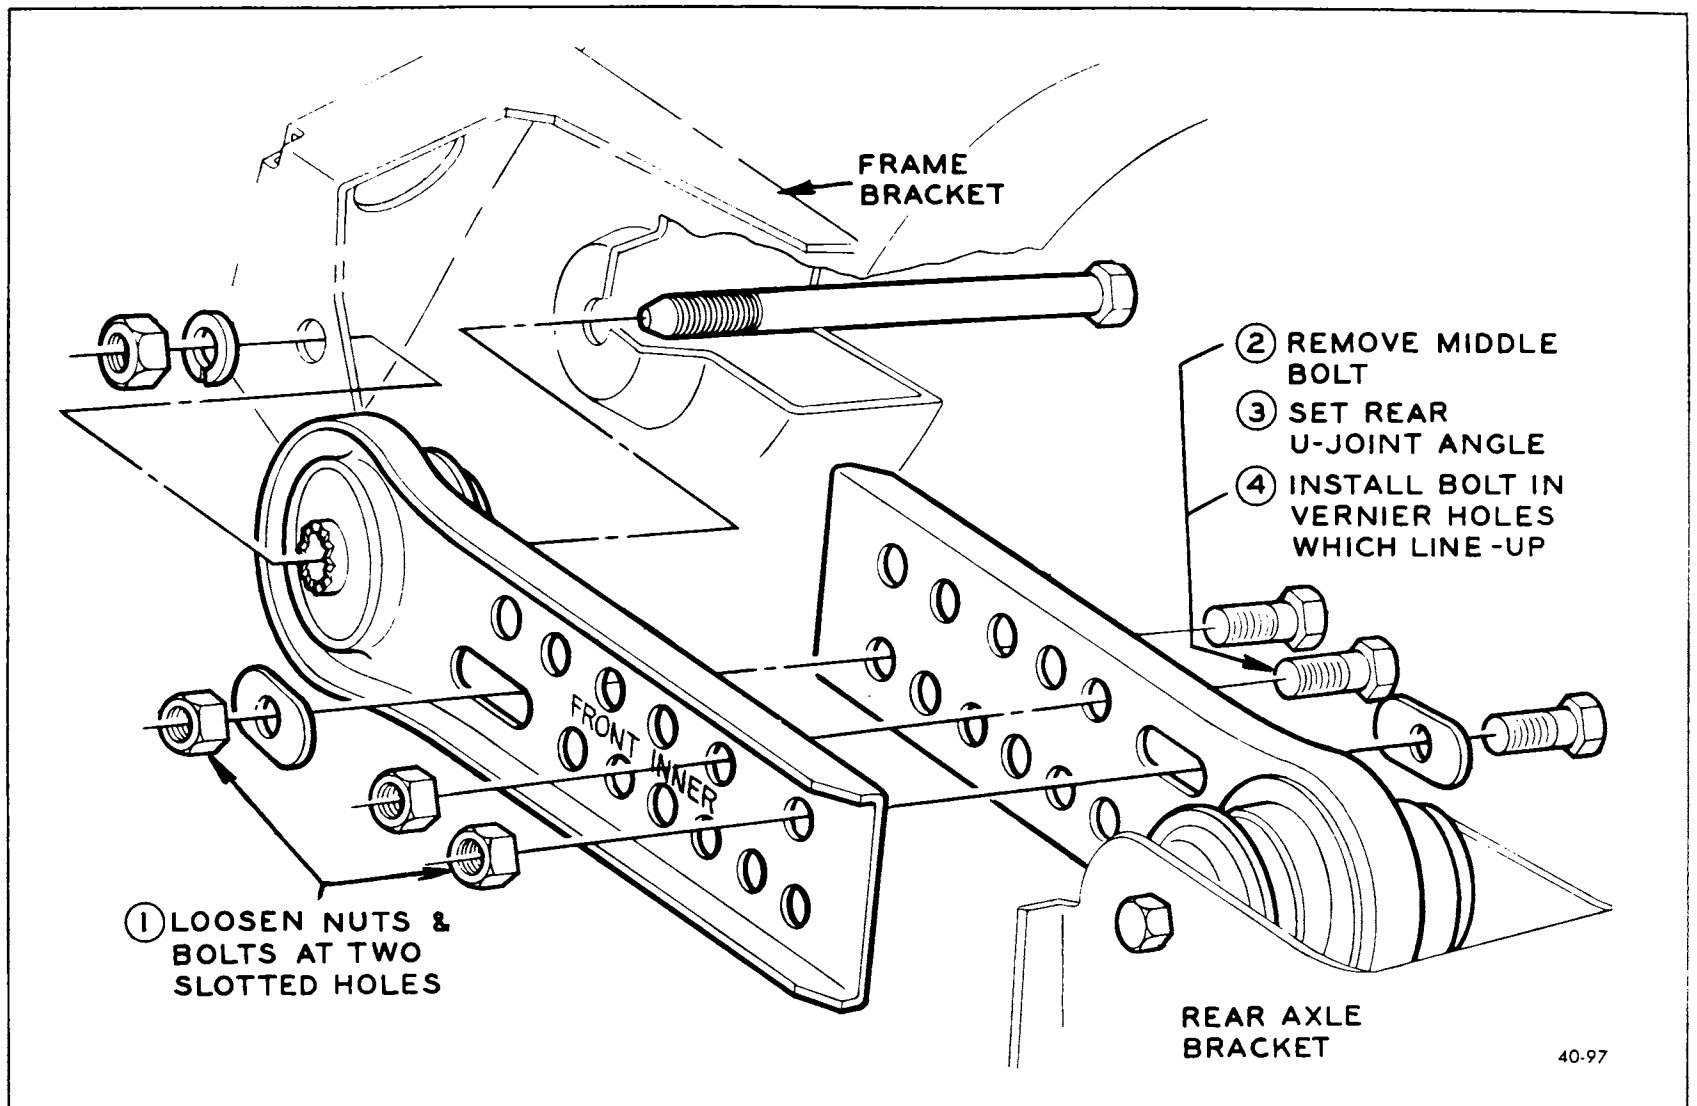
Adjusting Rear Universal Joint Angle, 49000
